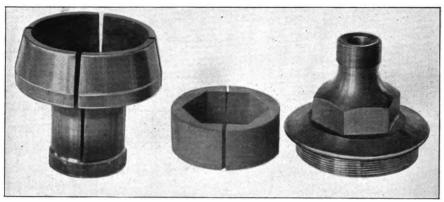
MASTER COLLET, FALSE JAWS AND VALVE BONNET TO BE HELD.
